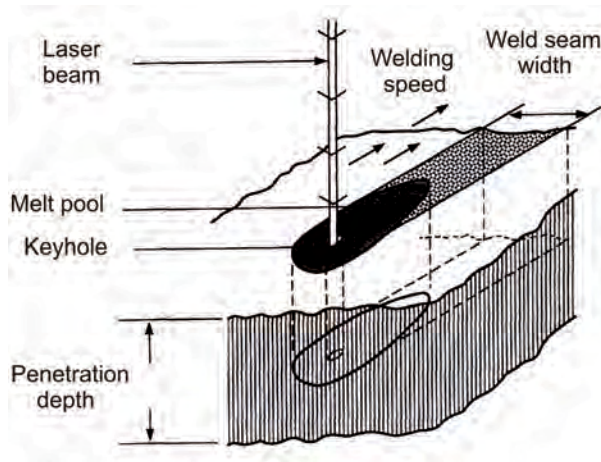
Process of deep penetration laser metal welding [89]
